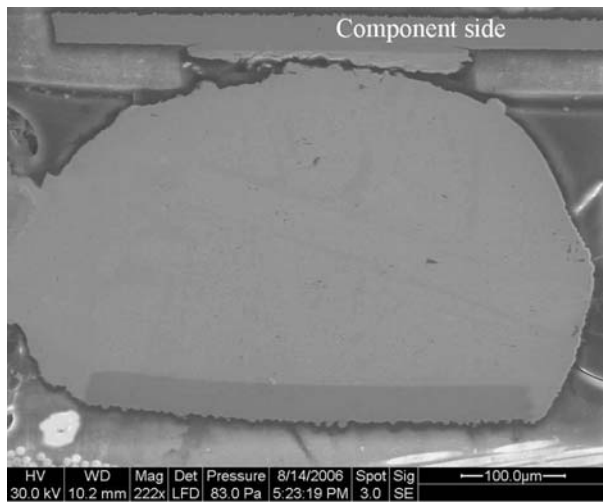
BGA (SnAgCu)-SnAgCu solder-ImSn finish (non-aged)--failed ball shows failure on the component side.
